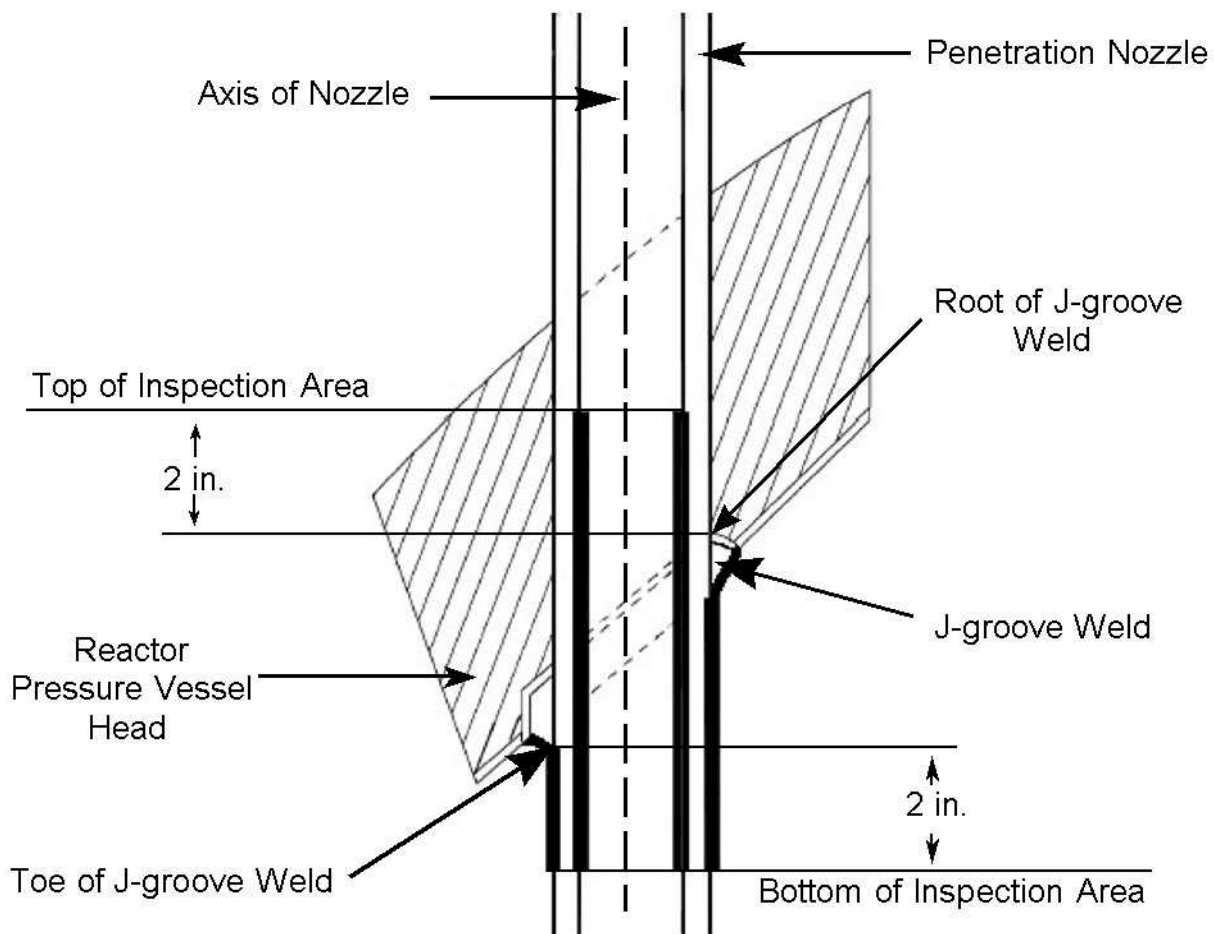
Required Wetted Surface Inspection Area Without Stress Analysis (The penetration nozzle and J-groove weld surface areas in black require surface inspection.)
